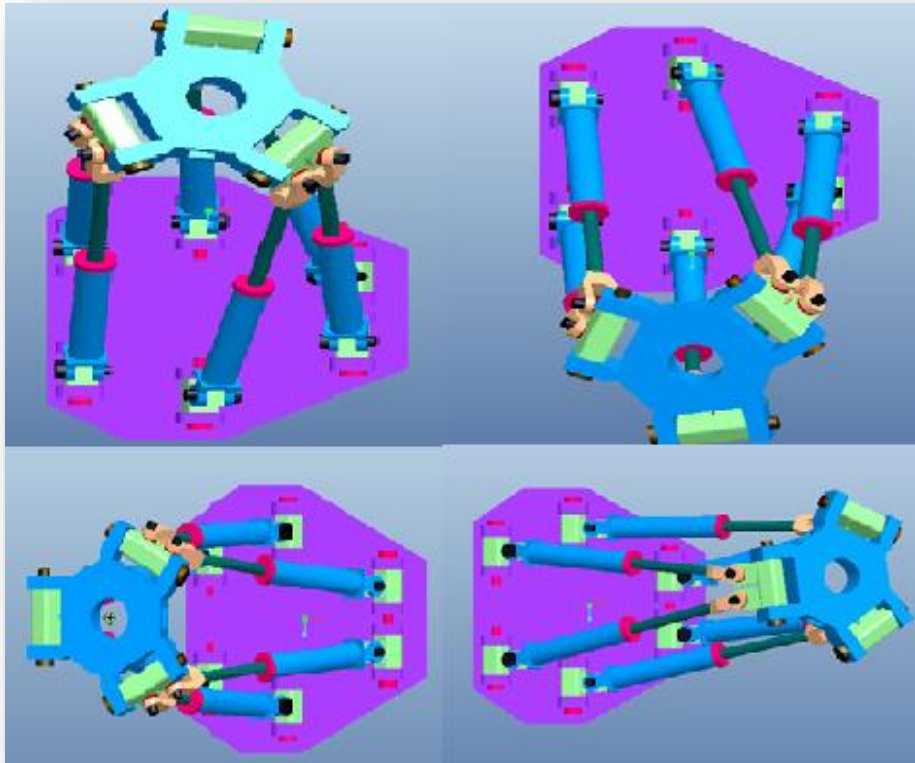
Side view (Left) and Front view (Right) of Fanuc F-200iB robot
